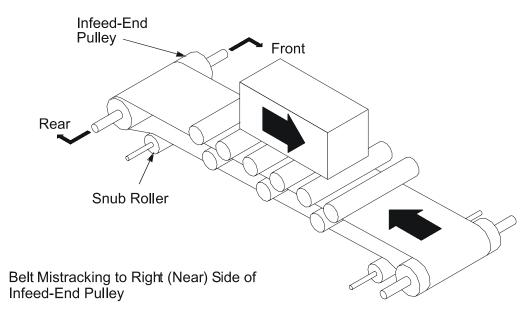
Tracking the Belt at the Infeed End of the Conveyor
